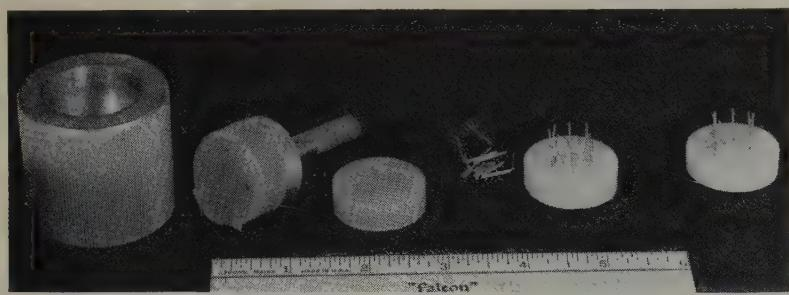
, this tooling was used to produce the preproduction quantities of the precision terminal board for the shift register. Left to right, mandrel housing; mandrel with chilled polyethylene mold still attached; polyethylene mold; terminal pins; terminal pins placed in mold; mold poured with epoxy resin. (See figure 1. The structure on the extreme left of figure 1 is one of these preproduction terminal boards wired to the memory cores.)
